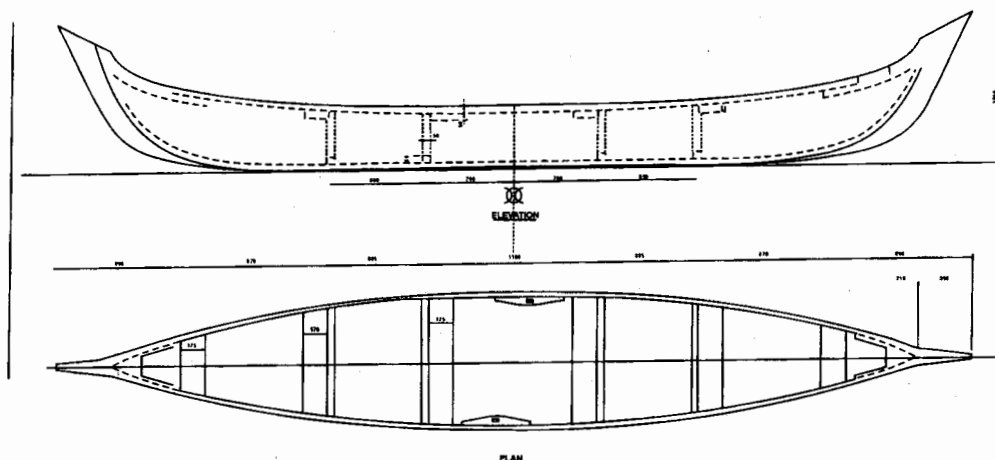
Elevation and Plan of 6.47 m LOA rubber wood canoe
